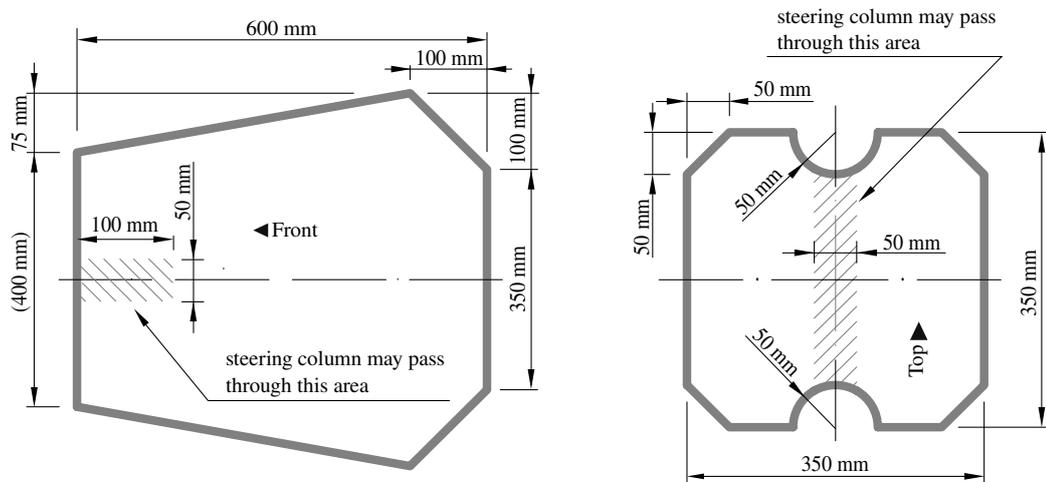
Cockpit opening template (left) and cockpit internal cross section template (right)
